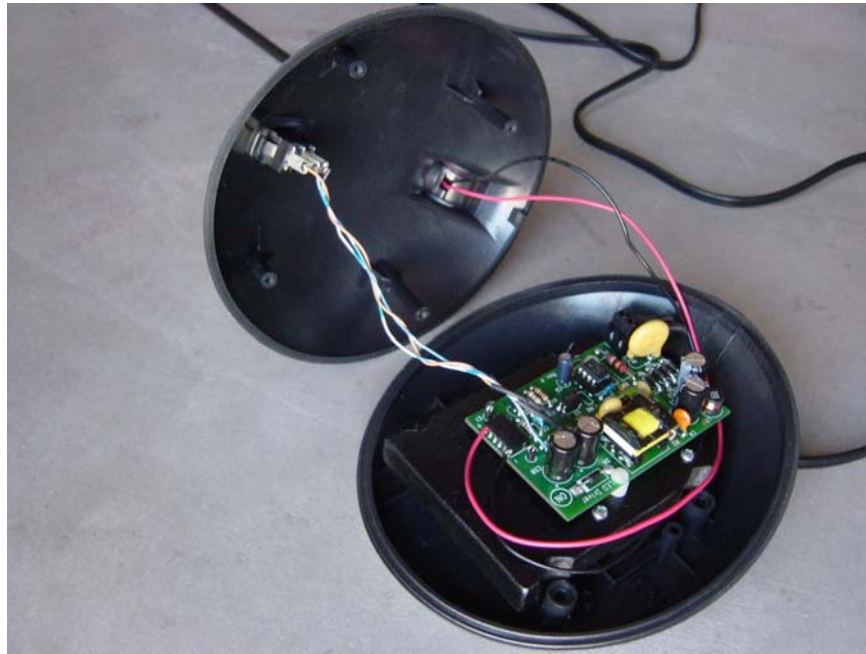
NCP1014 Constant Current Driver Board mounted in Base of Desk lamp
